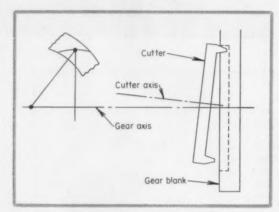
Relationship of cutter to gear blank during cutting of Formate gear.
